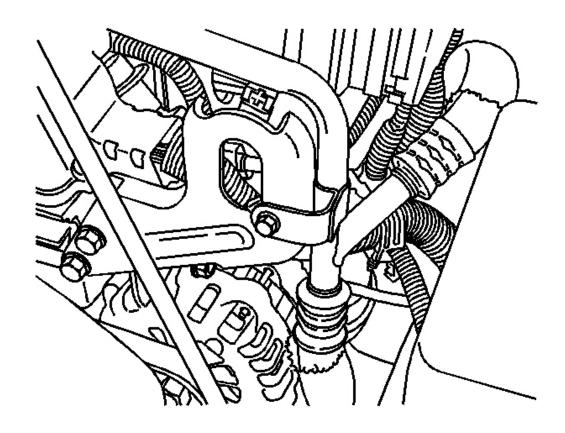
View Of A/C Line Mounting Bracket Bolt Courtesy of GENERAL MOTORS CORP.
